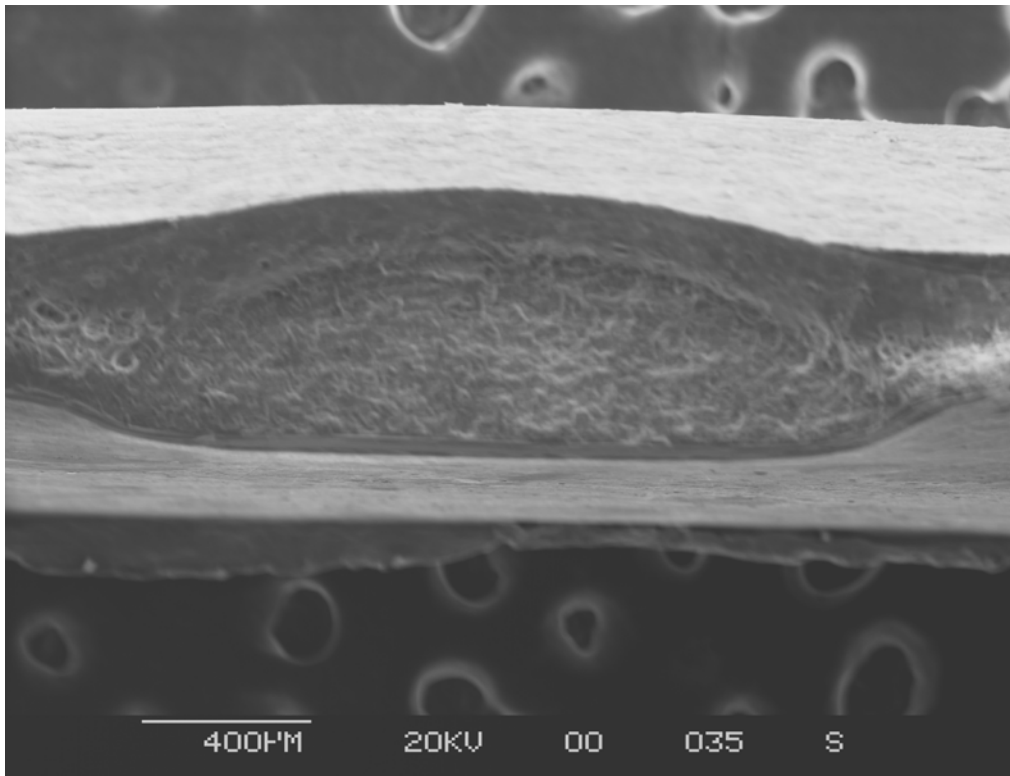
Edge Crack on Fracture Surface of Specimen 5636.
